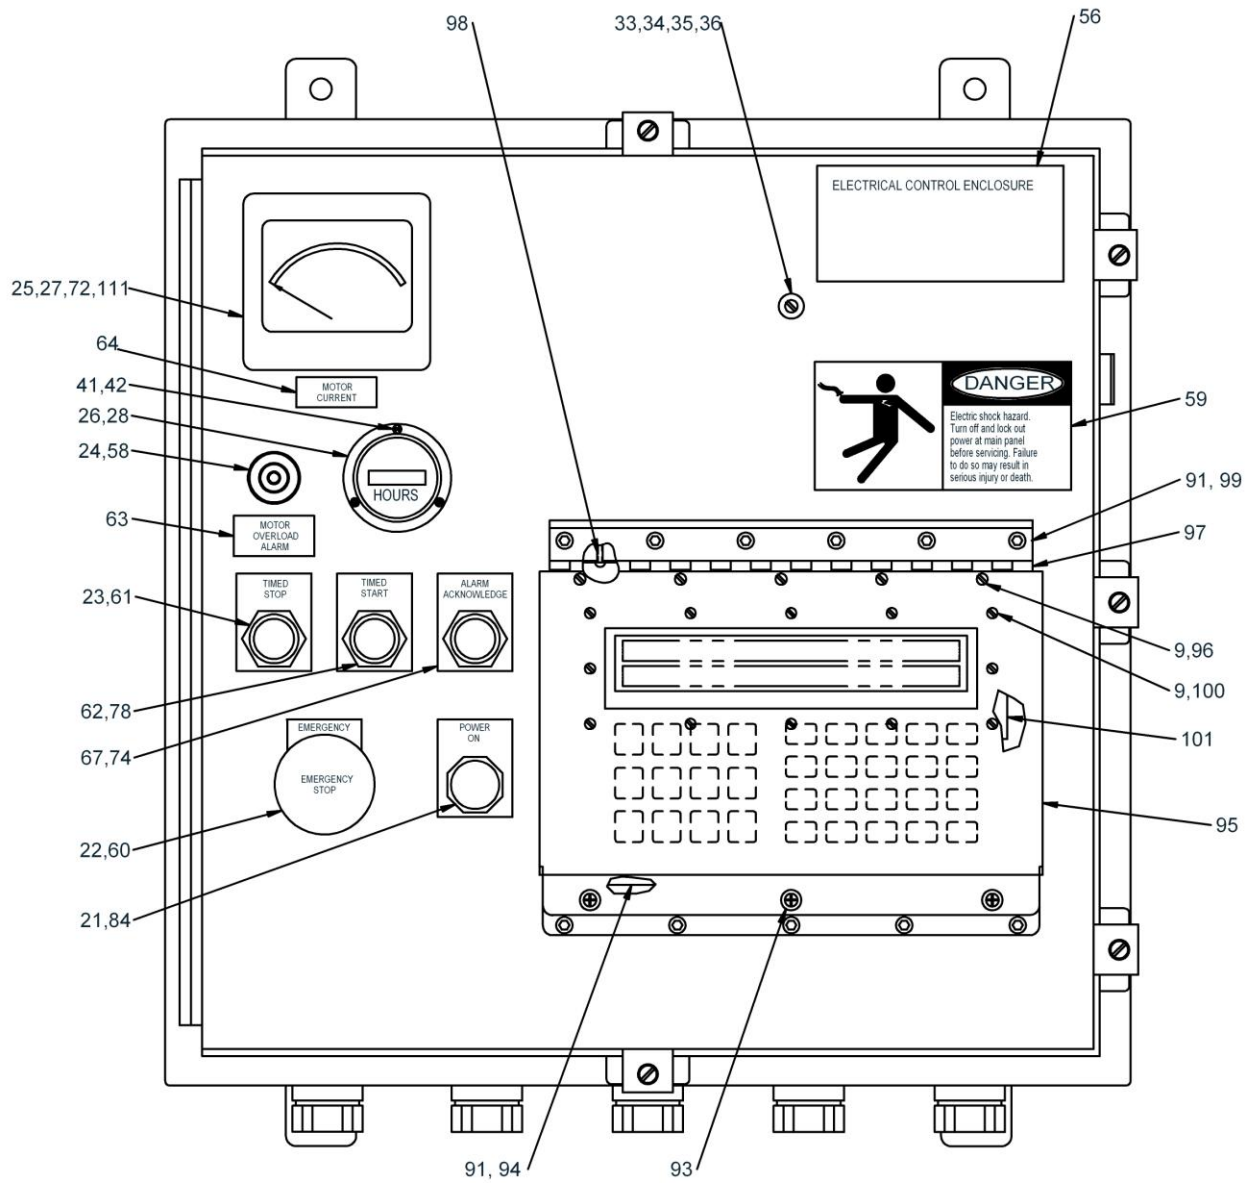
(SHEET 2) – FRONT OF ELECTRICAL CONTROL ENCLOSURE DOOR
